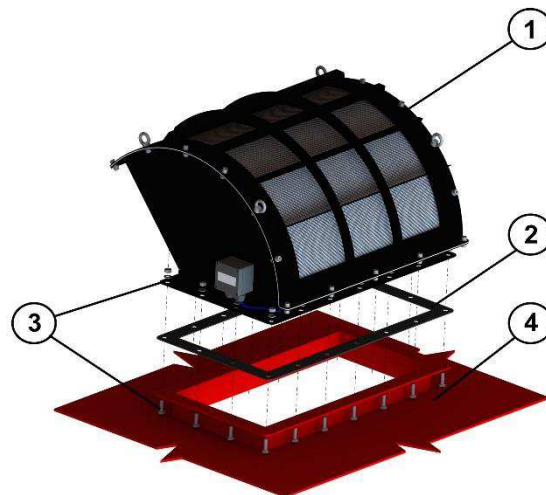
The Exploded View of the Rectangular FLEX (1 - FLEX, 2 - flange gasket, 3 - fasteners, 4 - protected technology)
